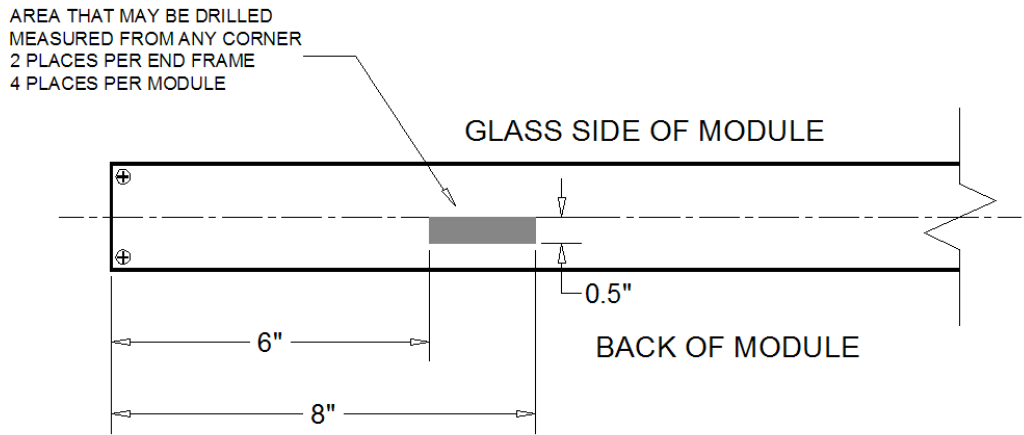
Acceptable Locations for Drilling the End (Short) Frame
